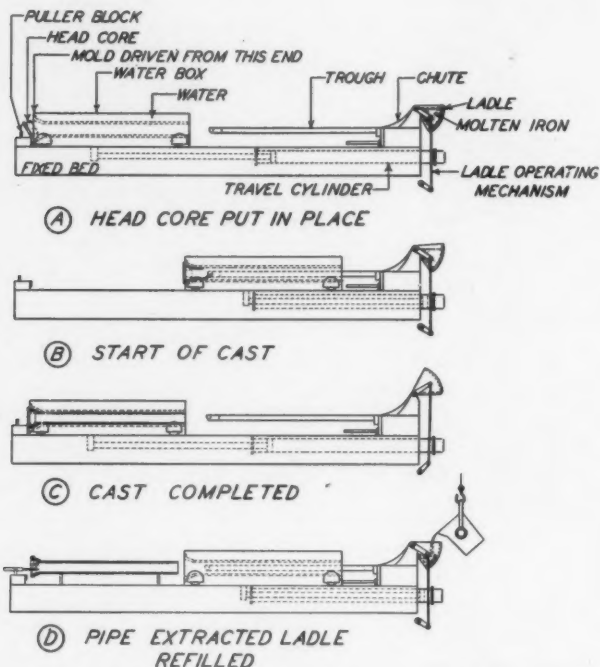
DELEVAUD CASTING MACHINE, SHOWING DIAGRAMMATICALLY THE OPERATIONS IN THE CASTING OF A CAST IRON PIPE.
